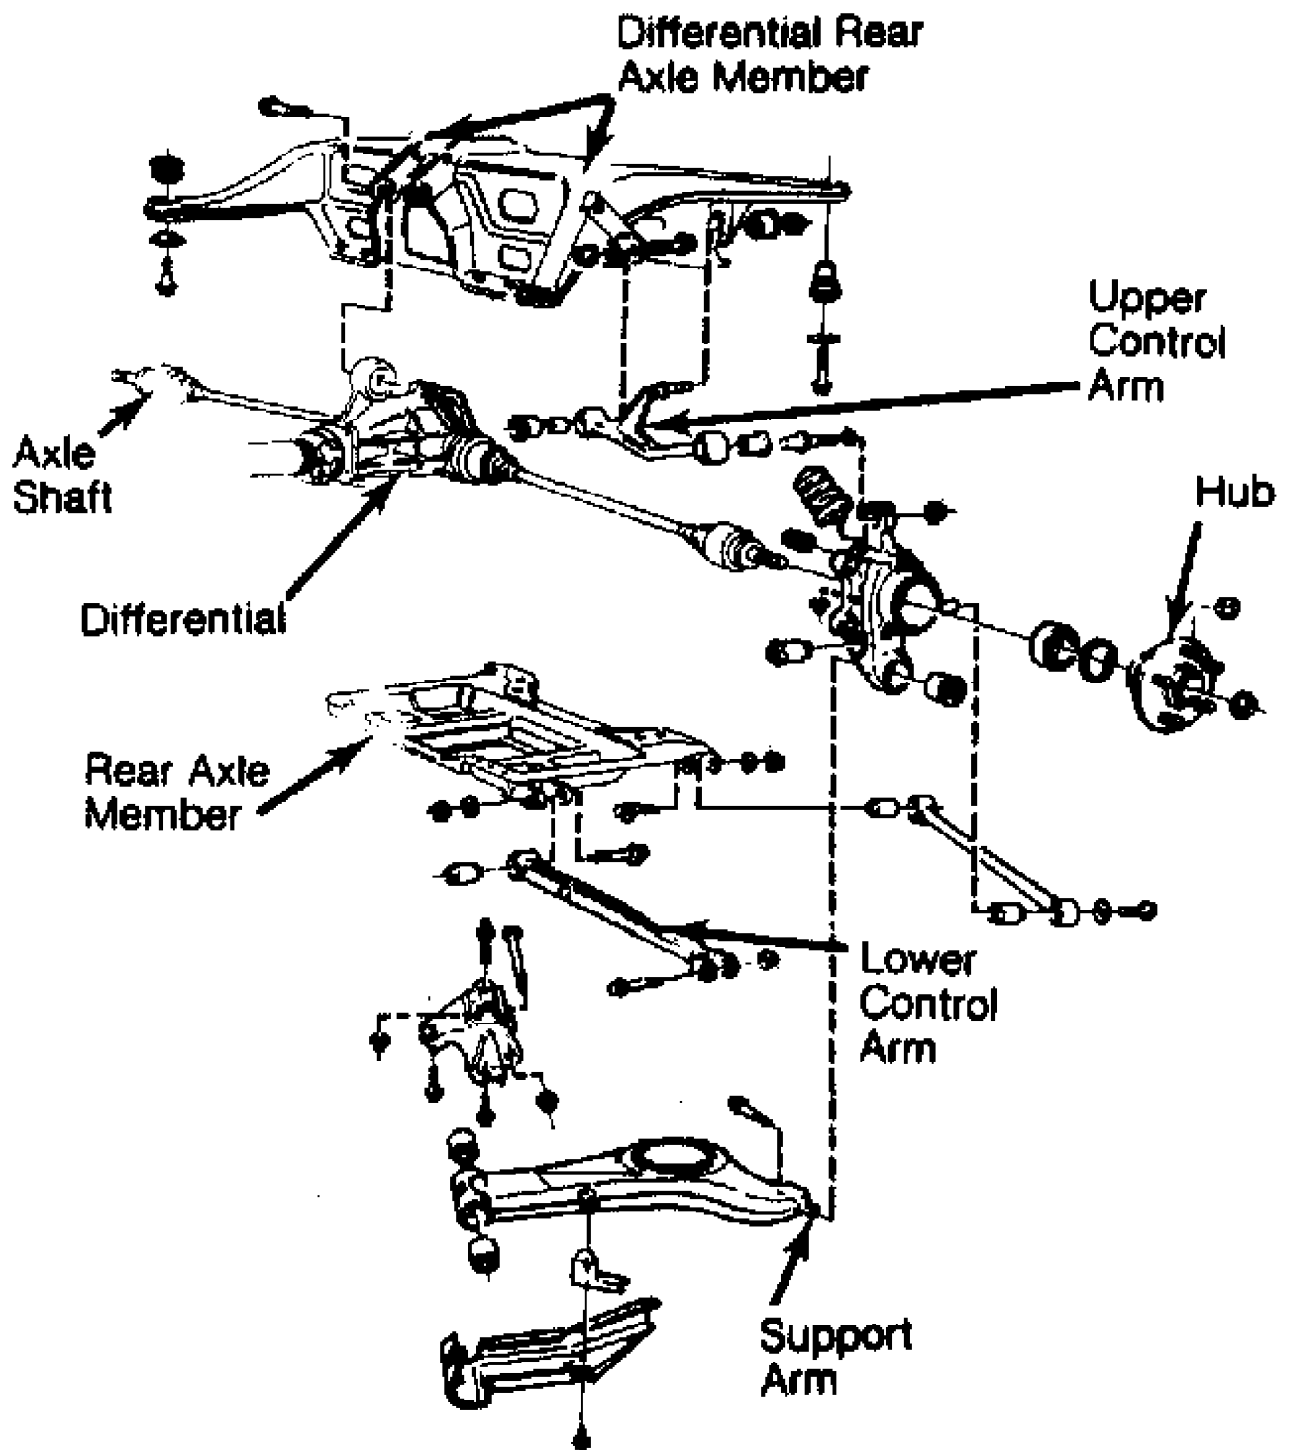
Exploded View Of Multi-Link Rear Suspension (960)
